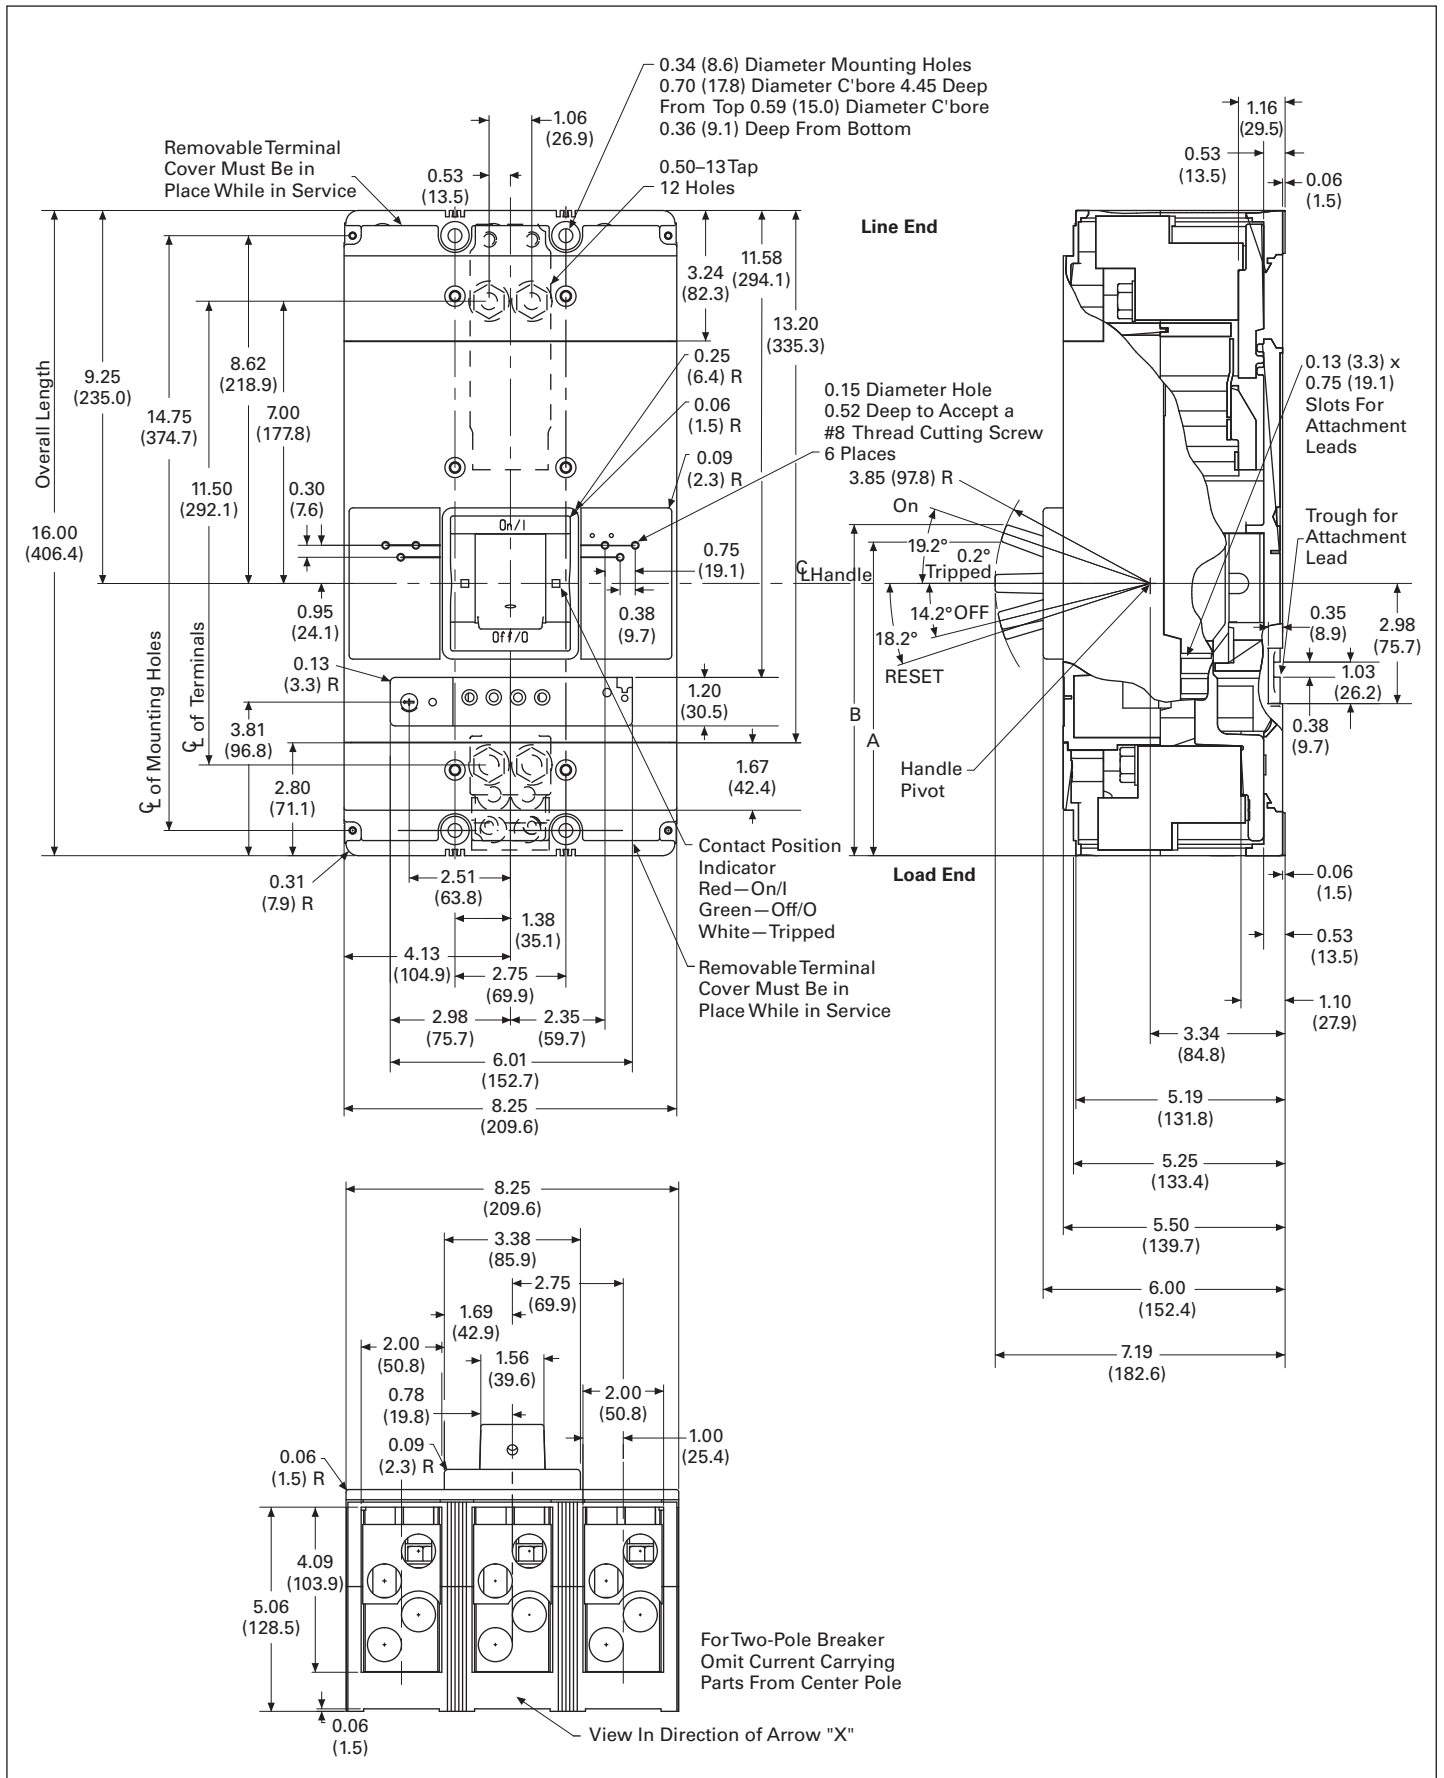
Type NG 900-1200A Three-Pole—Dimensions in Inches (mm)
